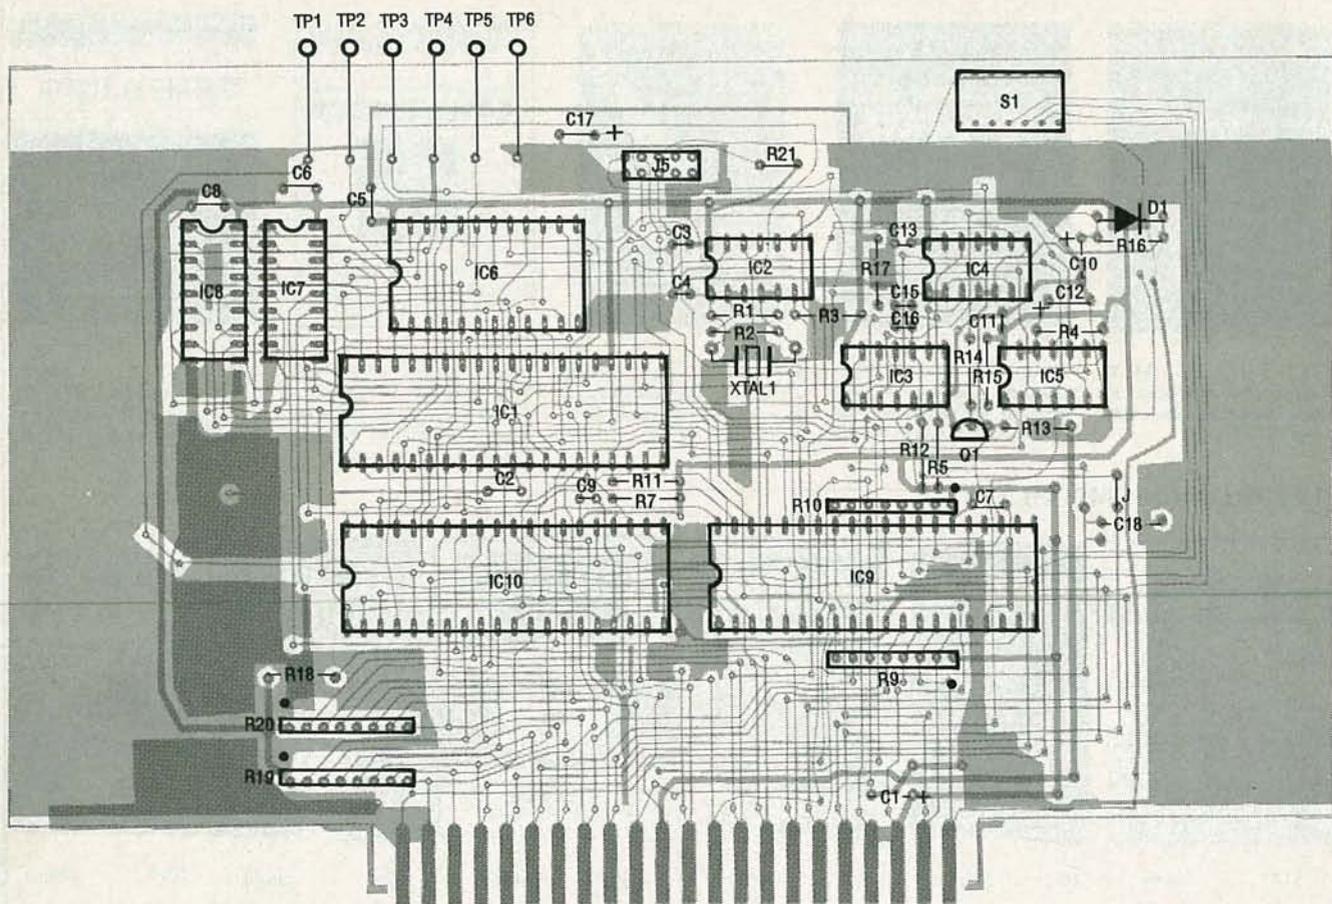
ASSEMBLE THE COMPONENTS according to this parts-placement diagram.
